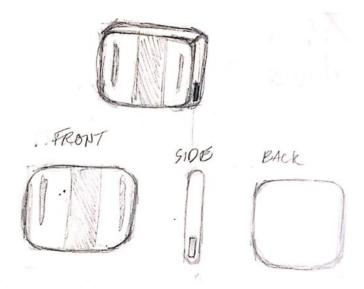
Mock up design of device housing Dimensions: 93.45 W x 67.35 H x 42.45 D (mm) Weight: ~138.6 g \*Dimensions and weight have not been finalized.
